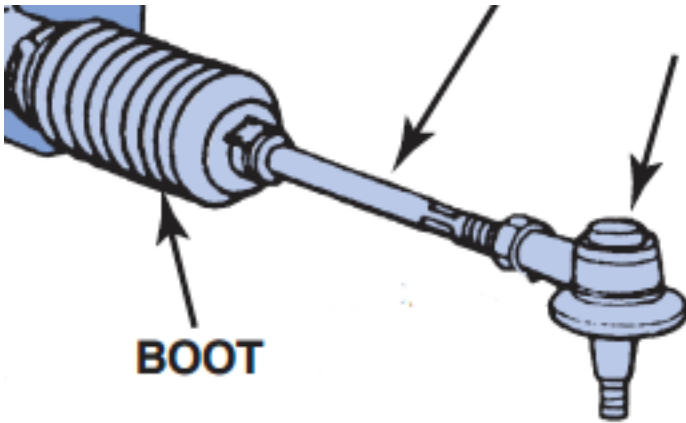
Disconnect the inner tie rod from the outer tie rod and remove the boot.
